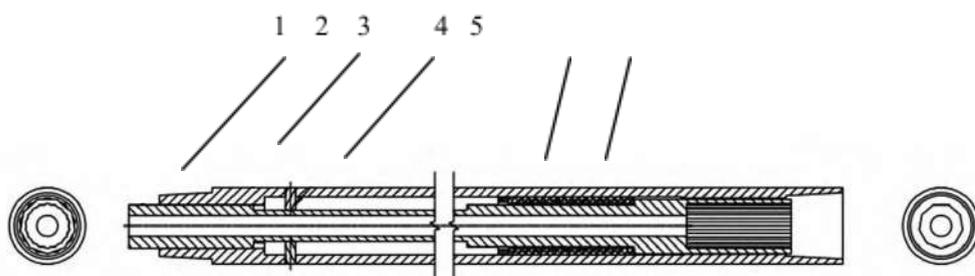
Schematic diagram of the structure of the self-locking forward and reverse drill pipe in the rod
